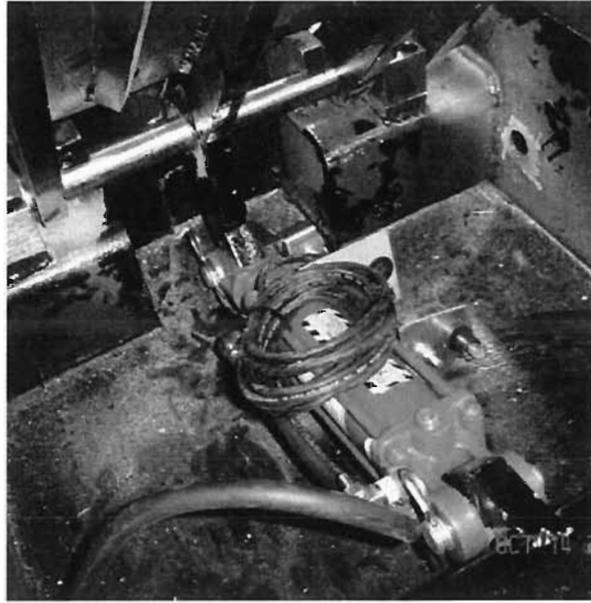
Hydraulic cylinder installed for hoses to enter from the left, limit switch on right.
